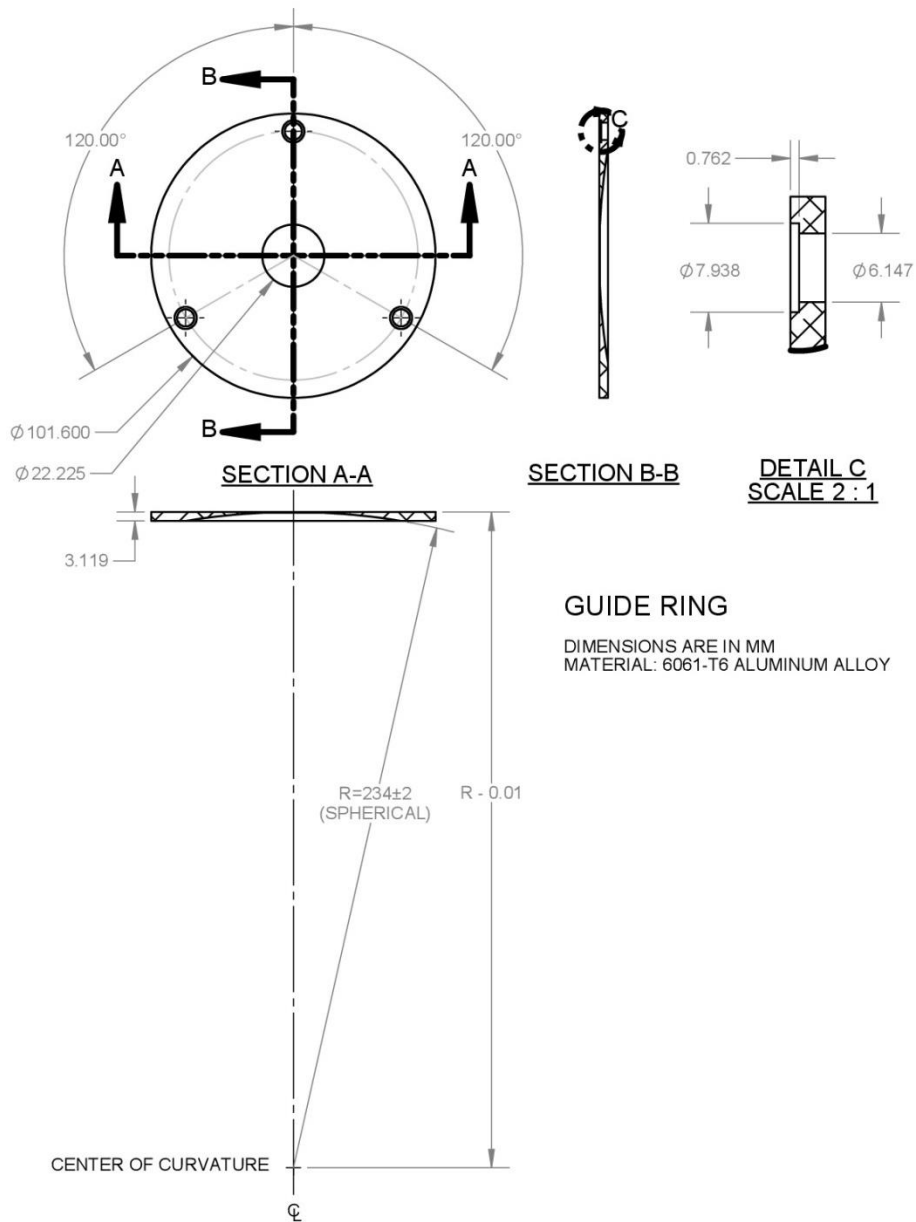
Mechanical drawing of the guide ring for making Sample 5 and Sample 6.
